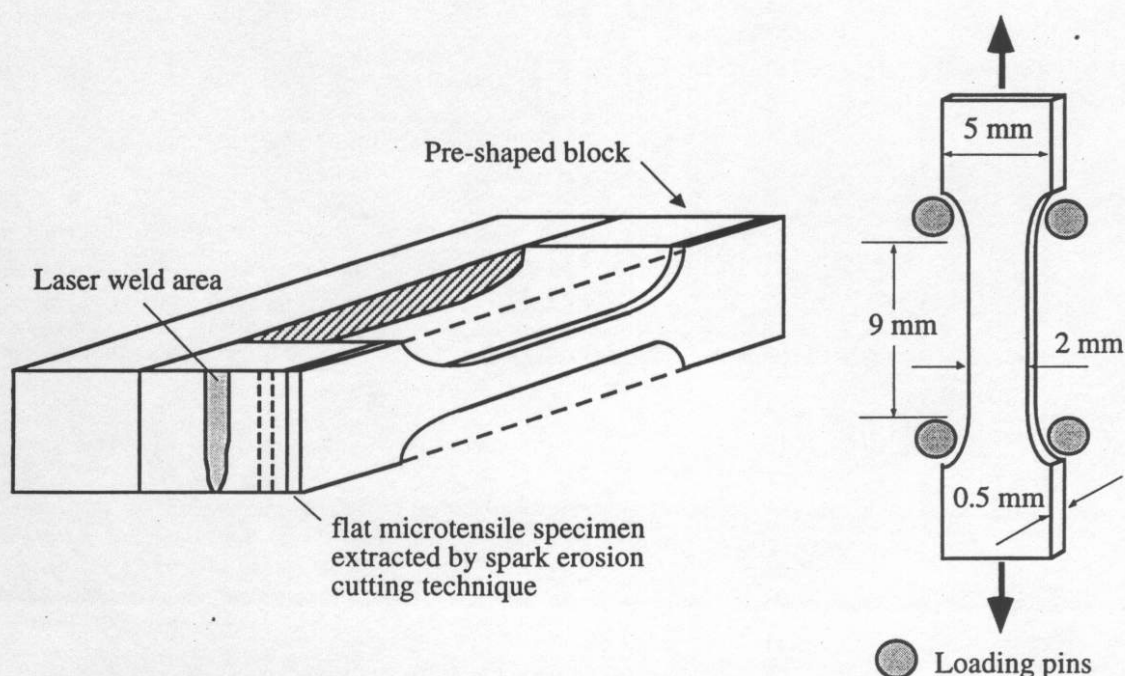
Schematic showing the extraction of flat microtensile specimens from laser welded sheet by spark erosion cutting [71].
